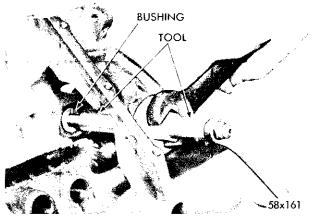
Burnishing Distributor Drive Shaft Bushing
